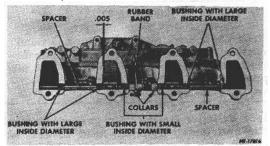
Swirl Destroyer Shaft Details (Early Production Engines Only)
